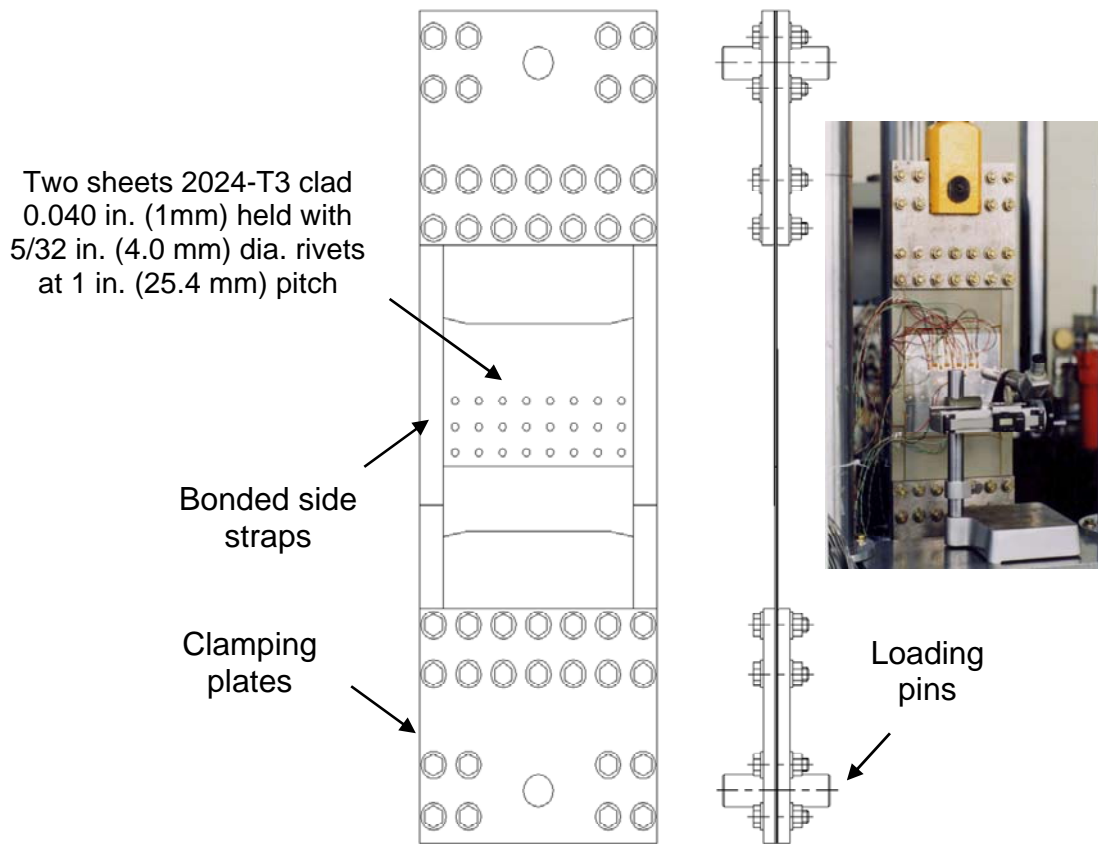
Lap Splice Specimen with Clamping Plates and Loading Pins
